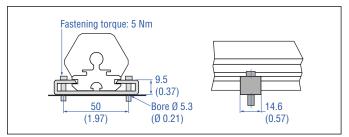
Mounting clamps (part no. 400 802) with cylinder screw M5×20
